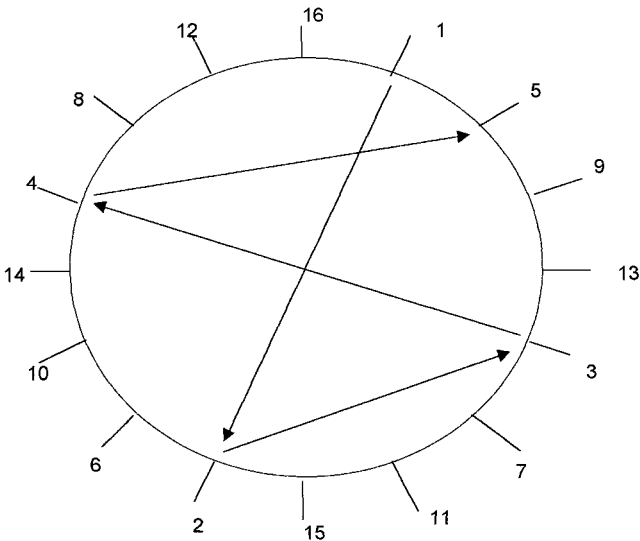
Typical torquing cross pattern of a 16-bolt flange.
